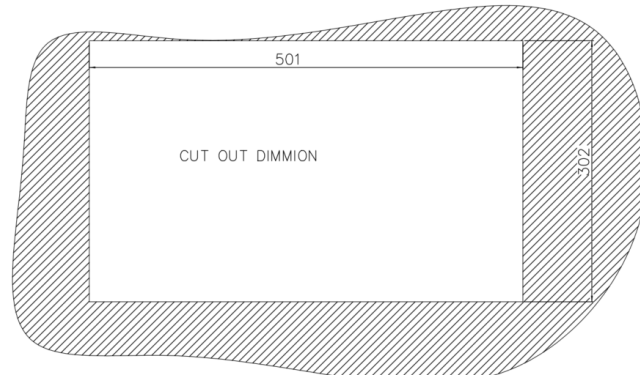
DM2-215K(L) Cutout Dimensions (Unit: mm)
